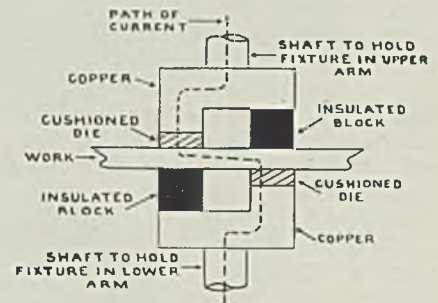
With this simple fixture applied to an electric resistance butt welder, the stamping was annealed quickly and effectively
